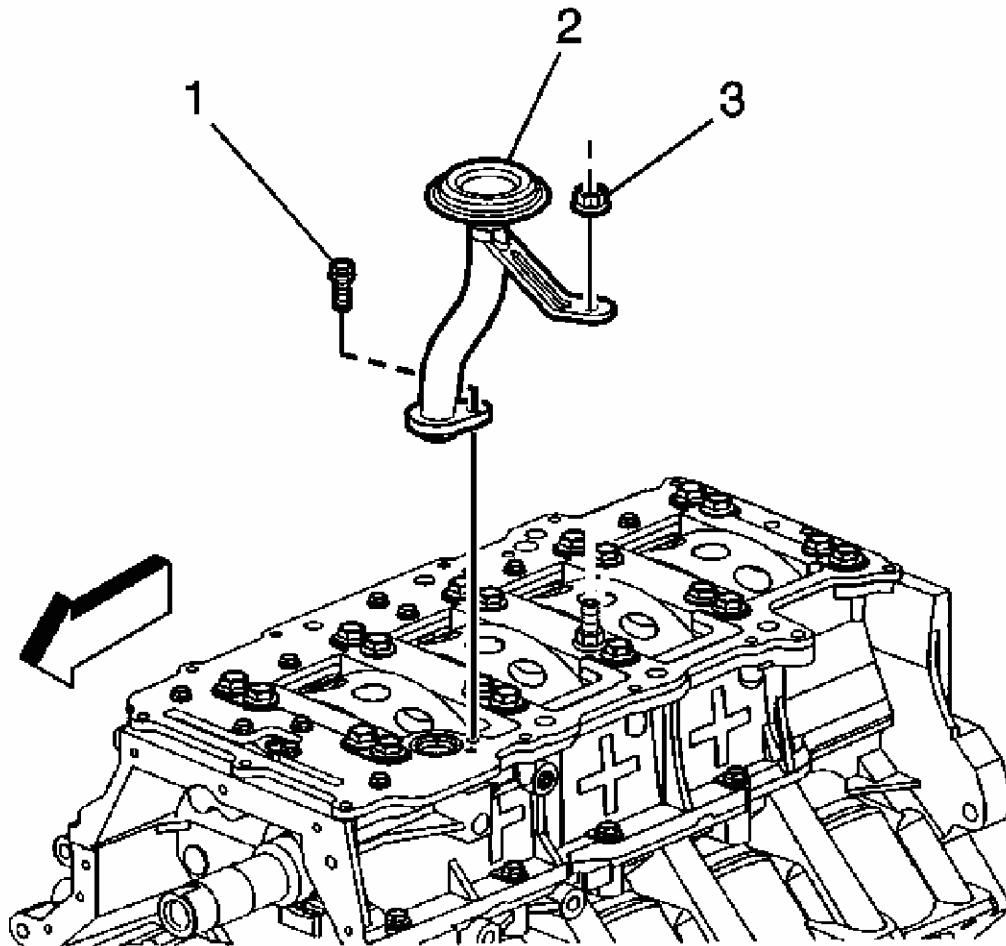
Identifying Oil Pump Pickup Tube Support Nut, Oil Manifold Mounting Bolt & Oil Pump Pickup Tube
